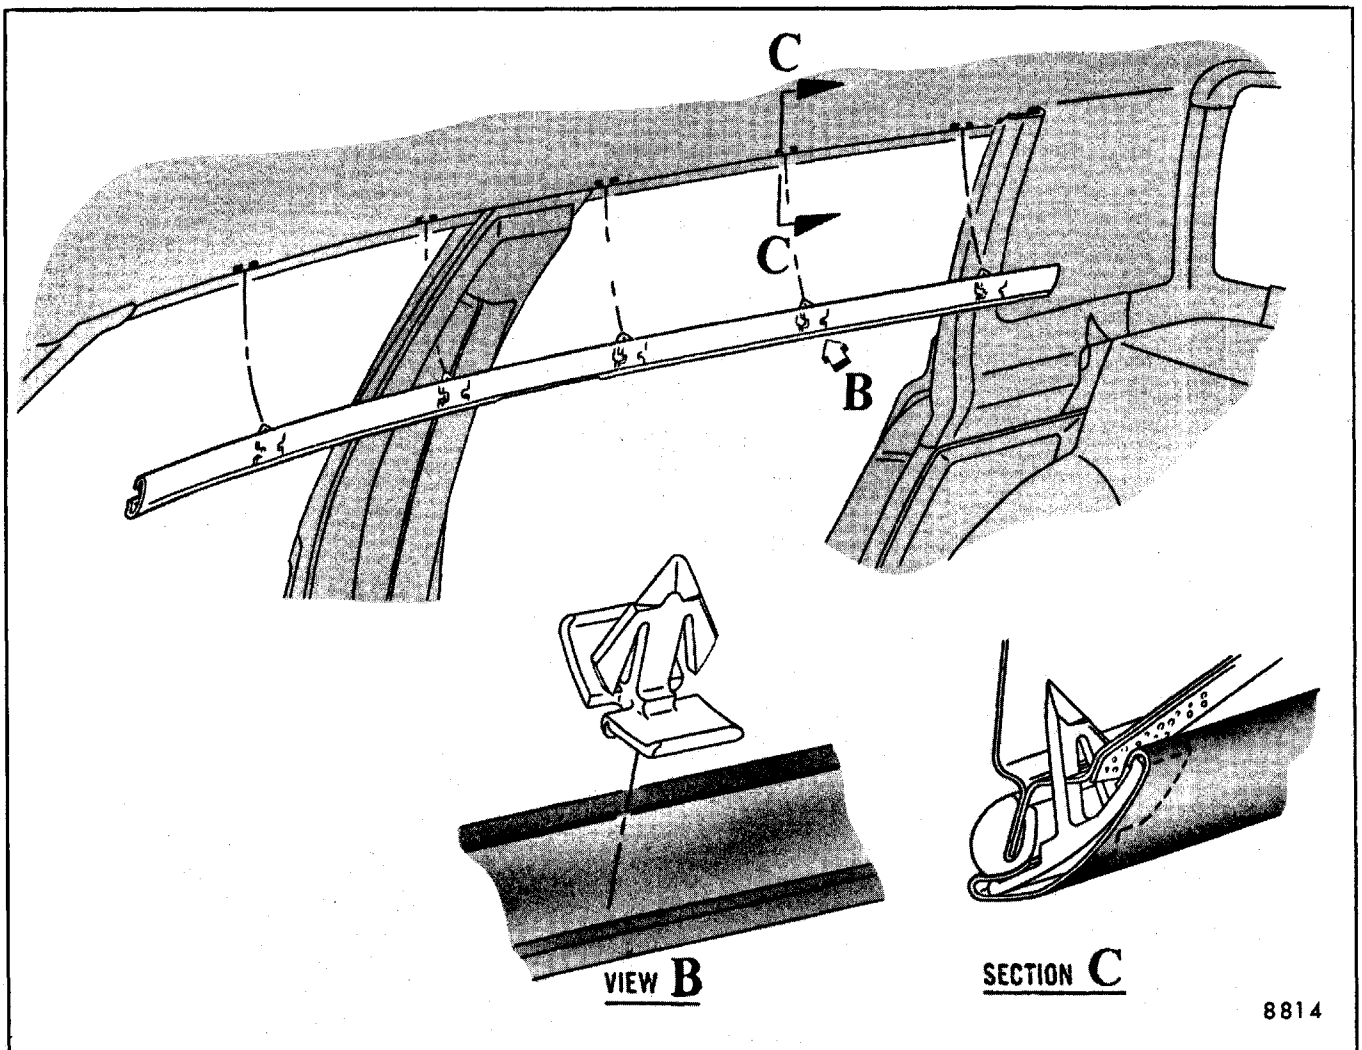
Side Roof Garnish Molding Attachment - "K" Styles
